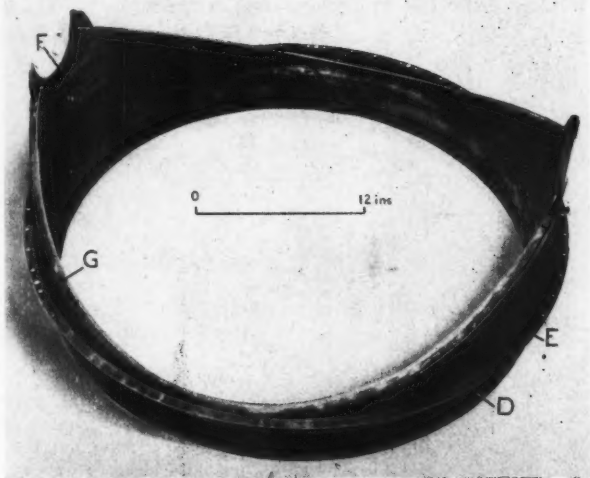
A semi-finished rear seal for the thrust reverser fitted to the Rolls-Royce Conway by-pass gas turbine engine. The inclined elliptical flanges of this component are machined on the edge and lower surface
